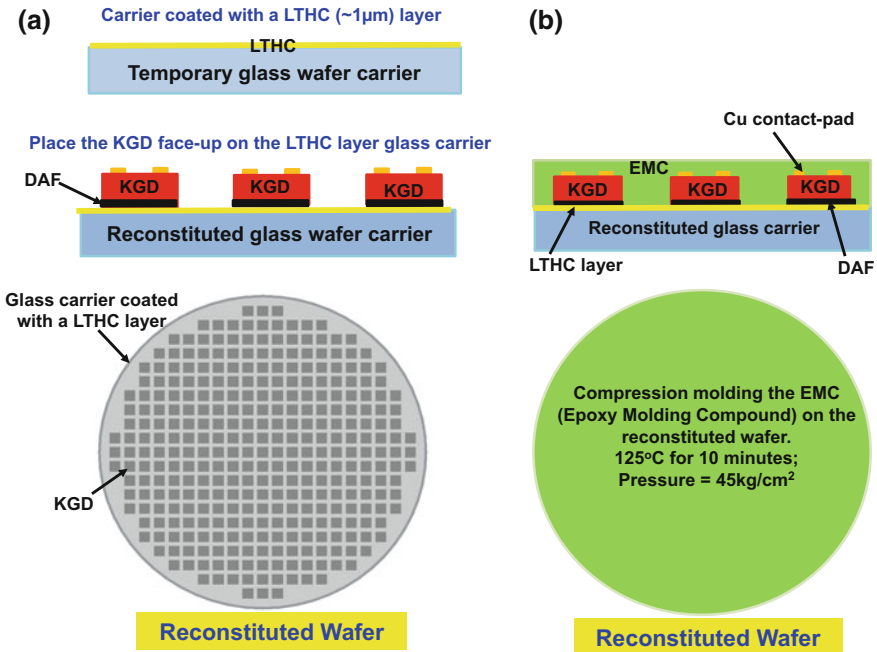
a Spin coat a LTHC layer on the carrier and pick and please the chip face-up on the carrier. b Compression molding the EMC
